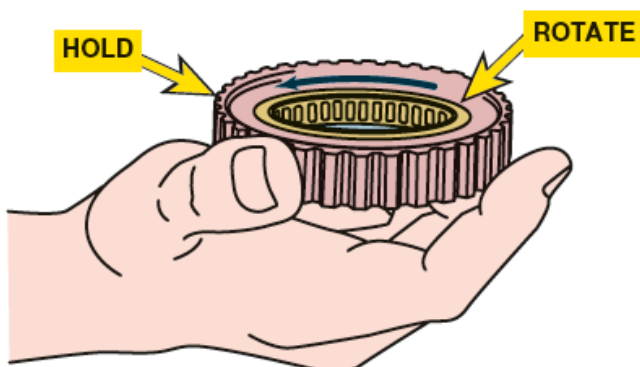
Service information states that this one-way roller clutch should be installed as shown. Check by holding the outer race so that the inner race is free to rotate counterclockwise as shown.
